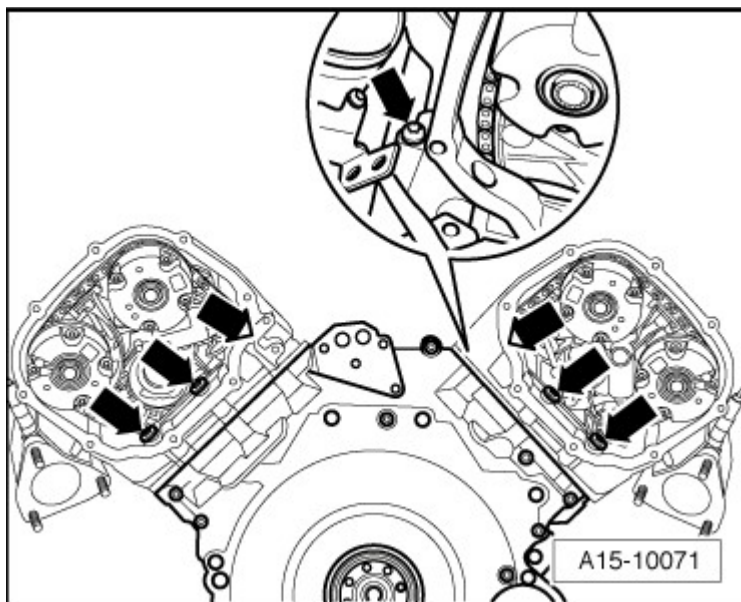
Identifying Bolts At Rear Of Cylinder Head
